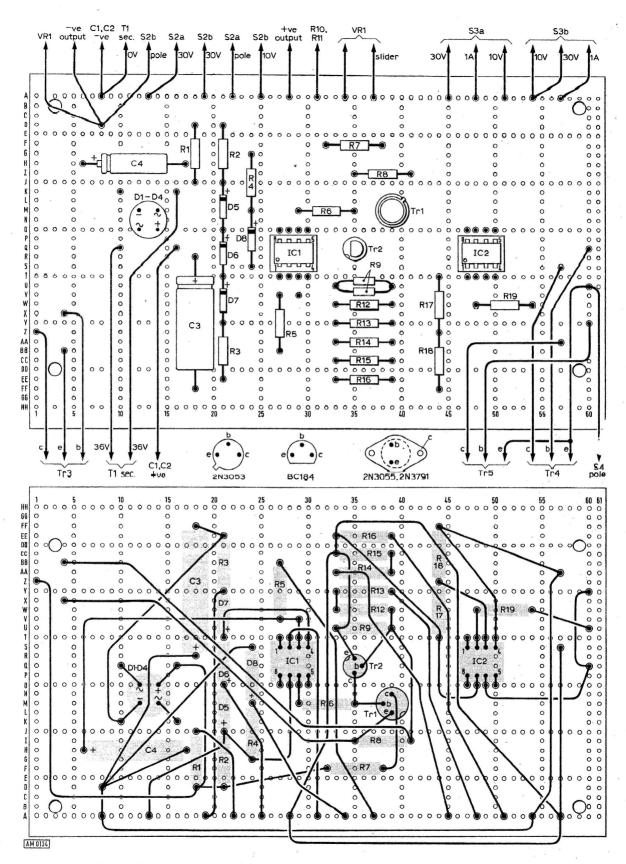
Layout of component and wiring sides of circuit board. All components are mounted on terminal pins.
